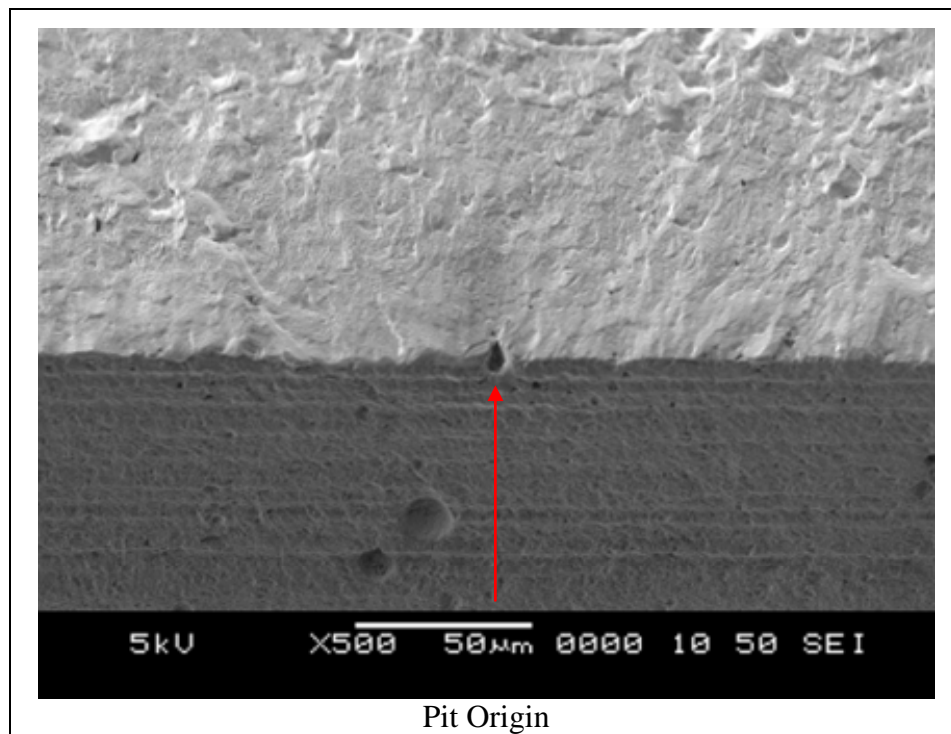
Tooth 1 primary origin, drive side gear fracture half.
